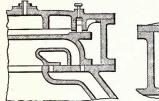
Showing equilibratingring on the back of a slide-valve.
